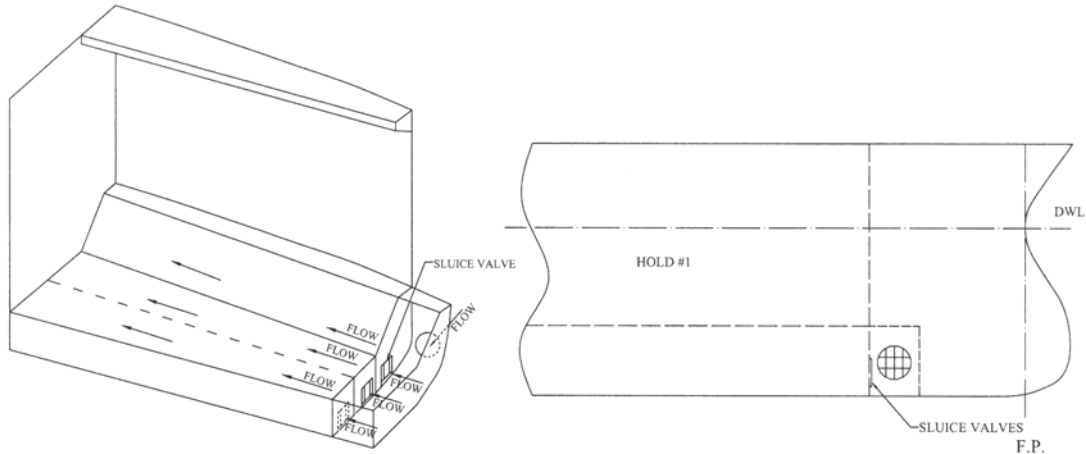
Typical Forward Plenum and Collision Bulkhead Arrangement
